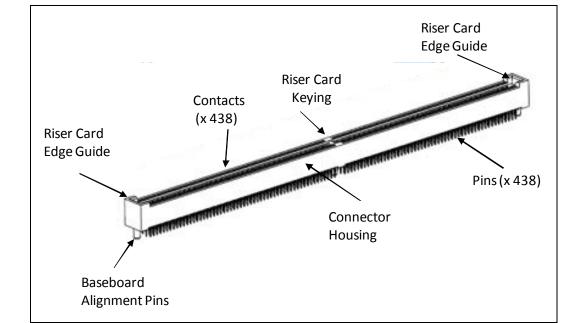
438-Pin PCIe* Riser Card Edge Connector
